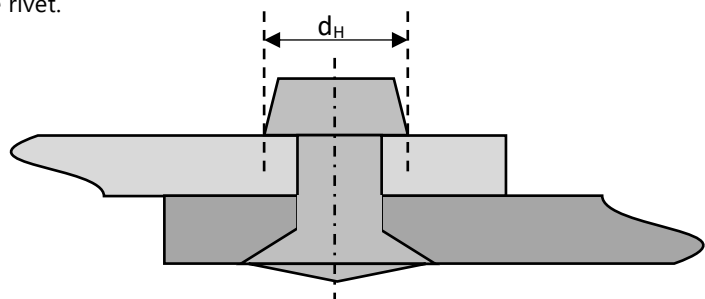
Detail of a Single Riveted Shell Seam Lap Joint
